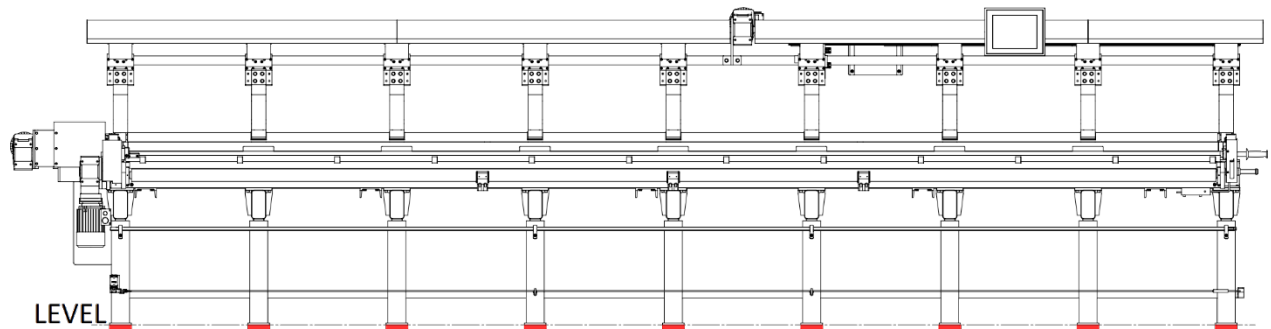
Front view of the machine, with added sheet metal (red) underneath the legs, ensuring that the machine is level.
